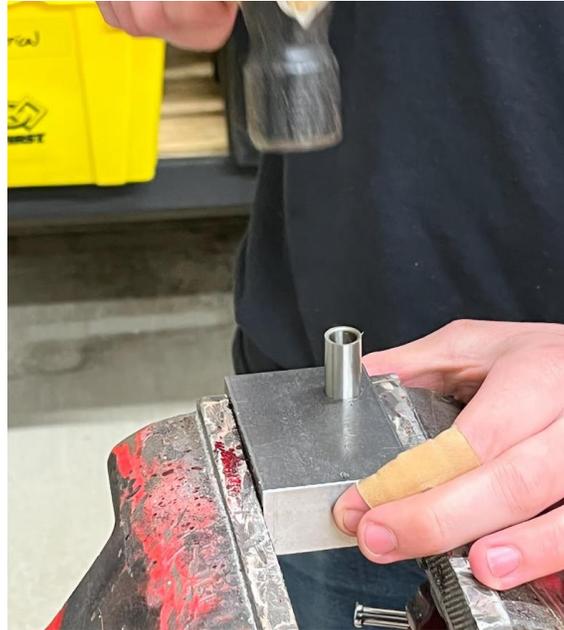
Inserting the bushing into one of the holes on the workpiece.
